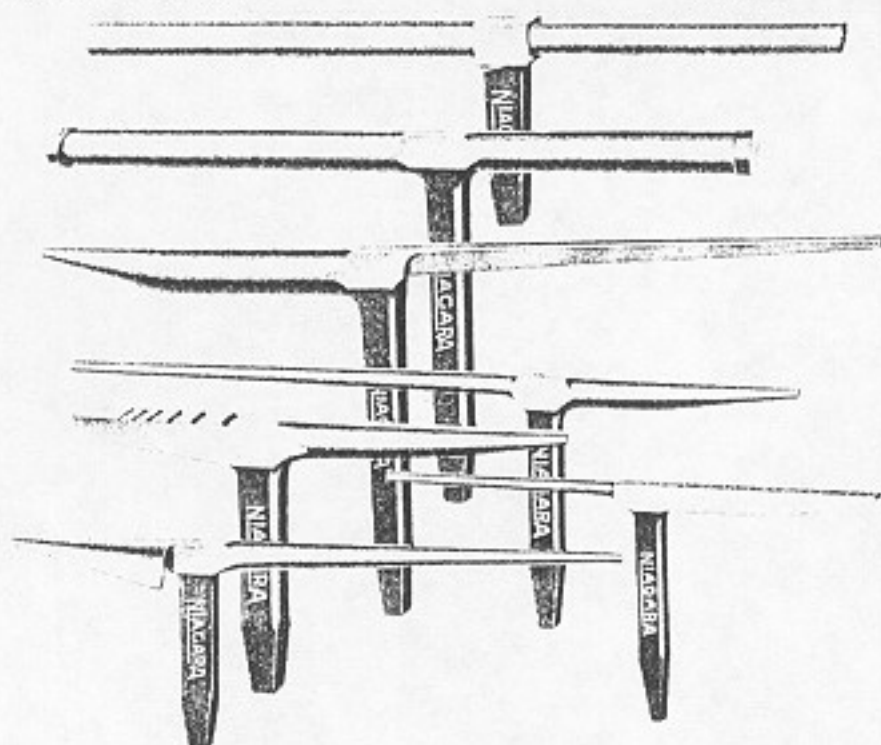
Stakes Used in Sheet Metal Work. (Courtesy Niagara Machine and Tool Works.)
